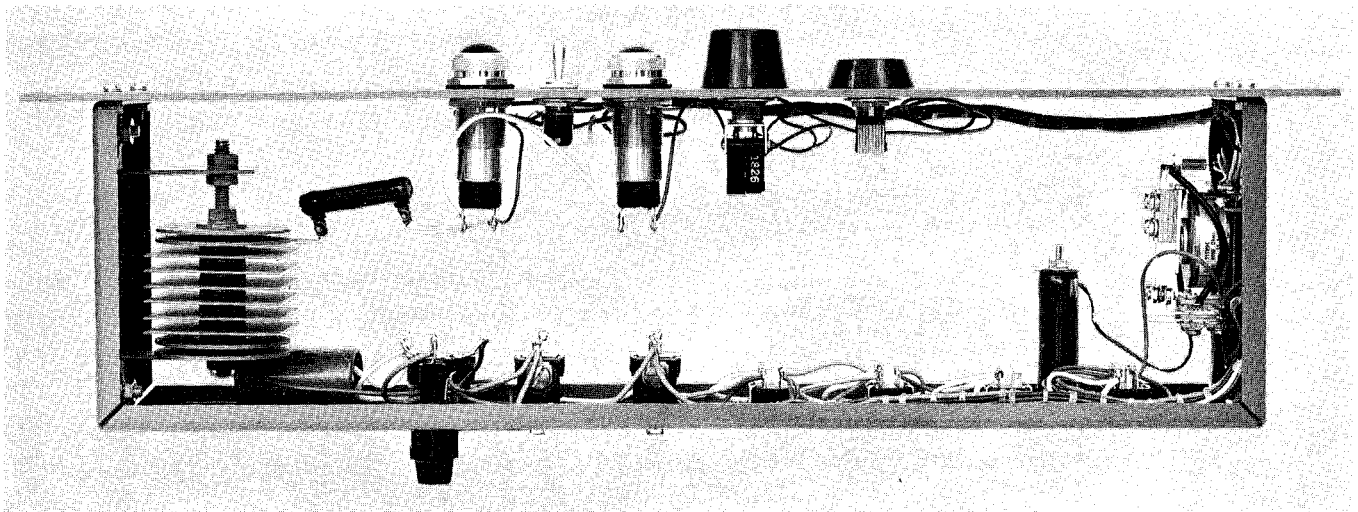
MASTER CONTROL PANEL PARTS LOCATION (INTERIOR VIEW)
